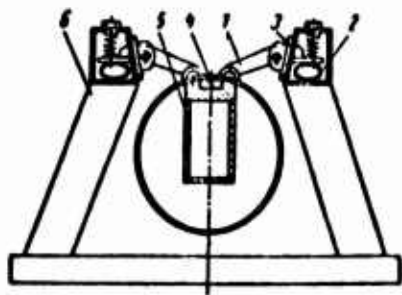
Diagram of clamp attachment for welding of longitudinal seams: 1 - clamp lug; 2 - rubberized hose; 3 - upper support beam; 4 - lining; 5 - lower support beam; 6 - dock.
